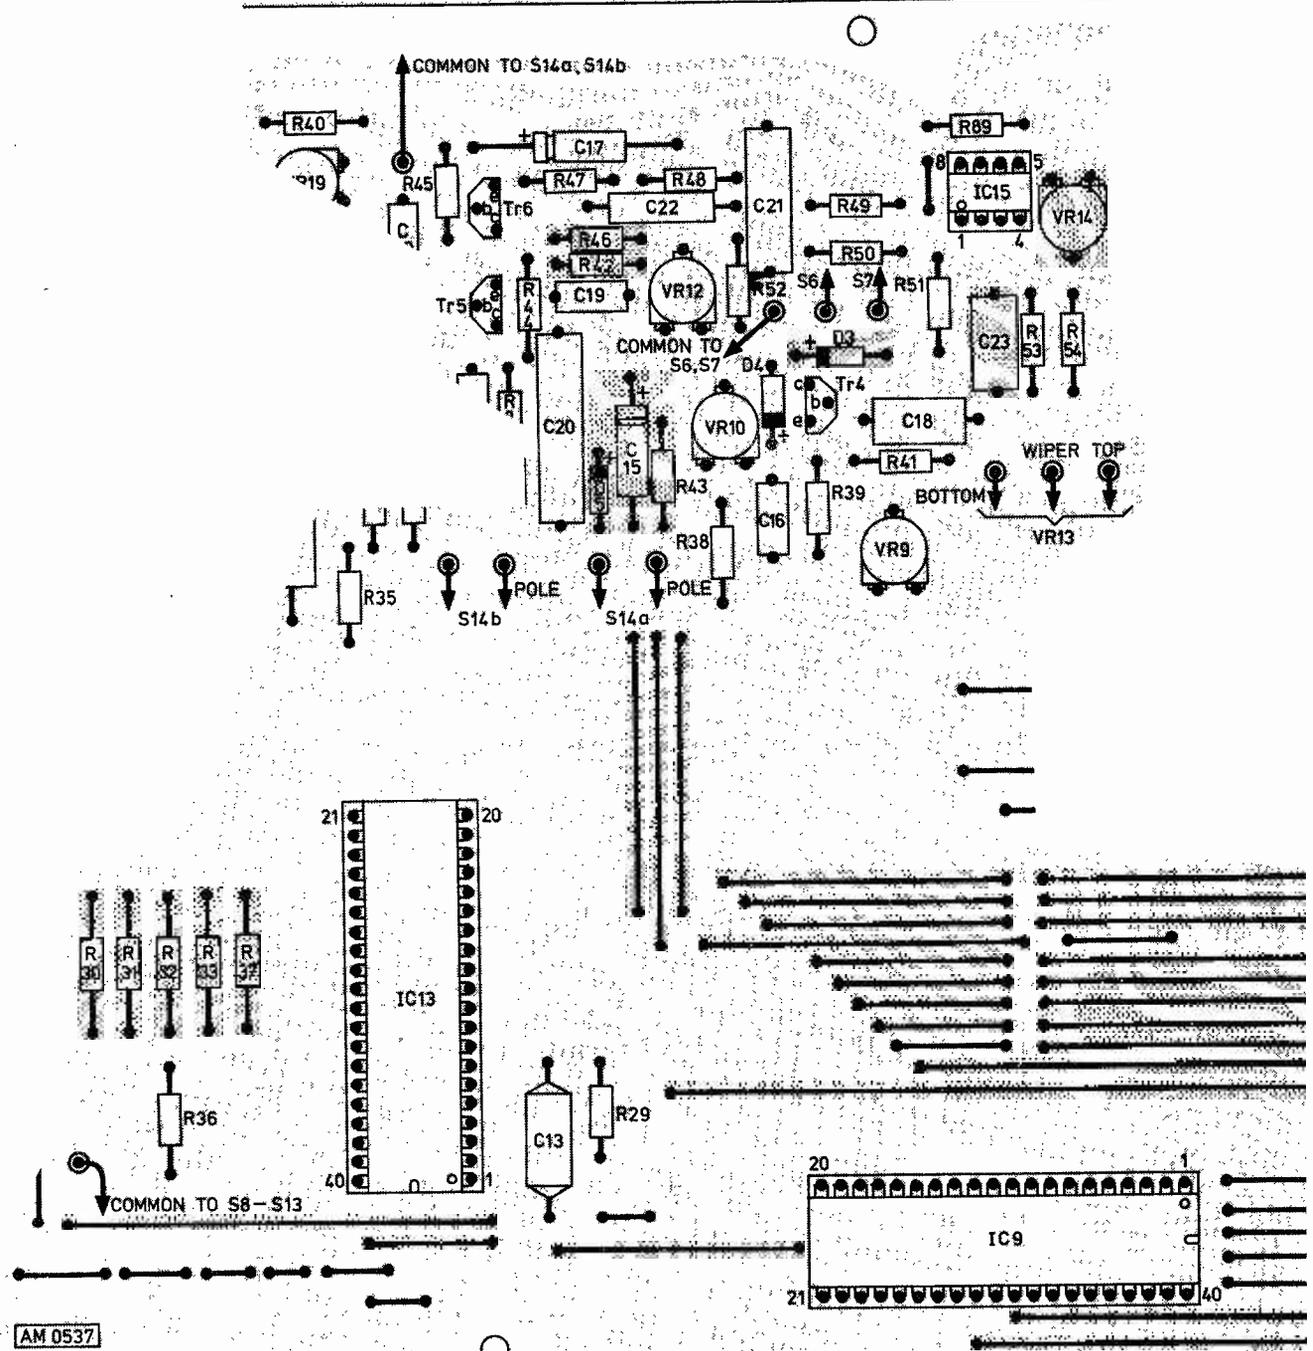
Assembly details for the circuit shown in Fig. 5.
